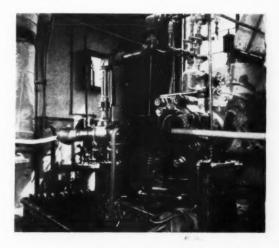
Tubing Machine with 90-Degree Cross-Head for Hose Covering
